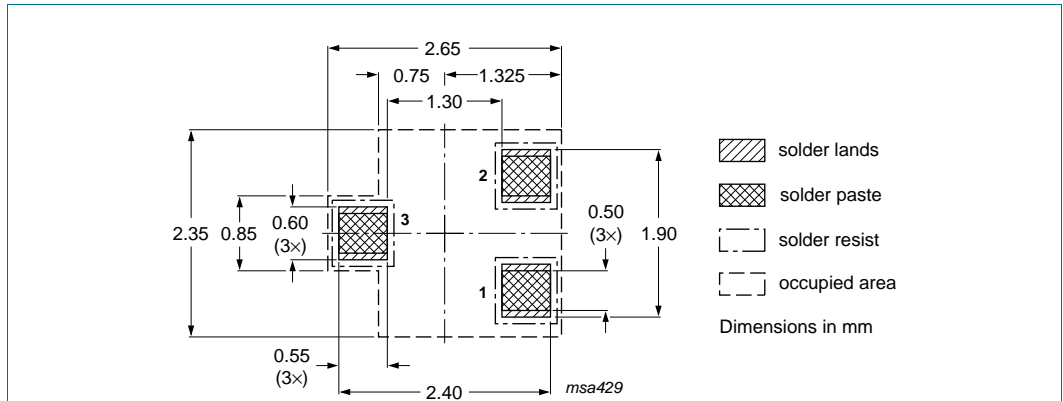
Reflow soldering footprint SOT23 (TO-236AB)
